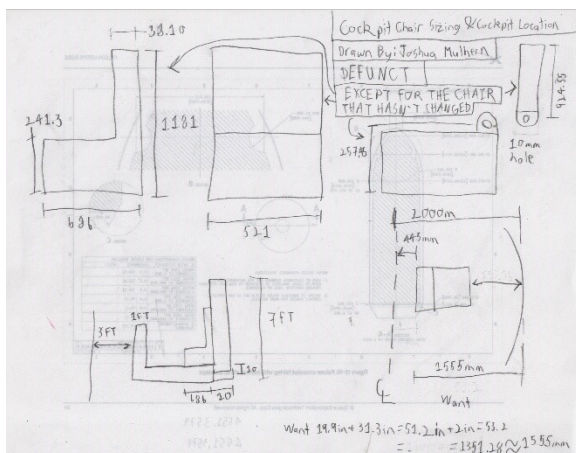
Hand Drawing Cockpit Chair sizing and cockpit location
